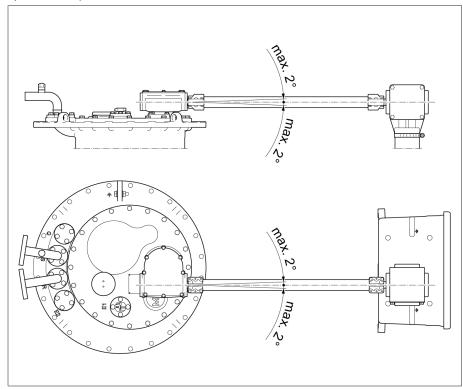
Permitted maximum axial displacement of horizontal drive shaft without cardan joint
